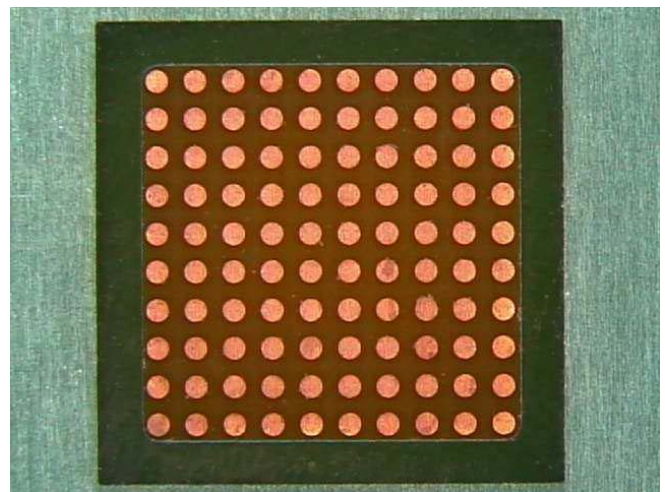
0.4mm Pitch Pad Design with 0.25mm Pads (10mils) & 0.15mm (6mils) Spacing
